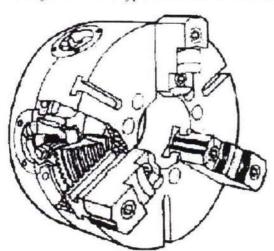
A typical three-jaw self-centering chuck of gear-scrolled design.
